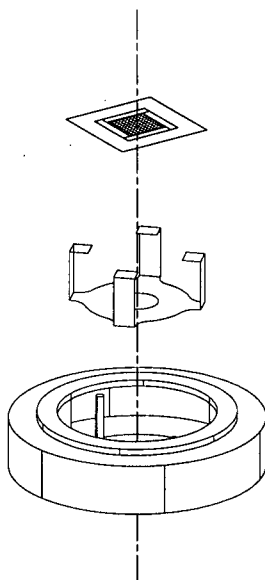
Bolometer holder assembly. The bolometer (top piece) is soldered to a flexible copper support (center) that is mounted to the copper ring (bottom) which is compatible with the dewar coldstage.
